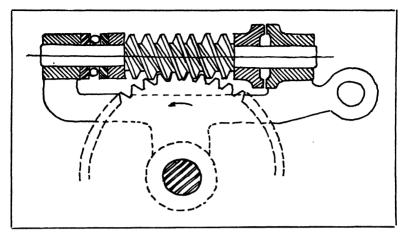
Ink Sketch of a Friction Ratchet Mechanism of the Worm-gearing Type
